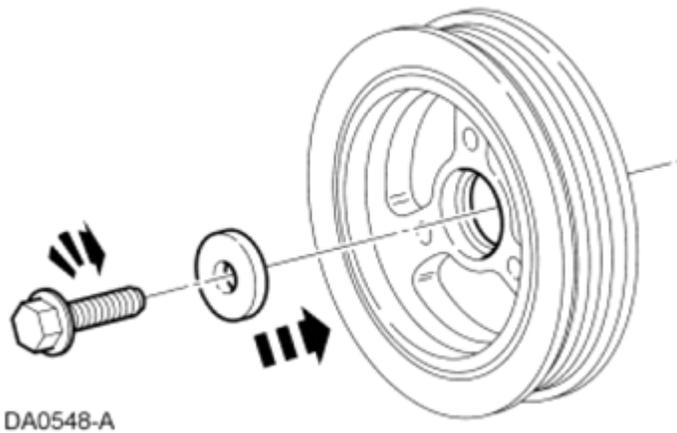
View Of Crankshaft Pulley Bolt & Washer
